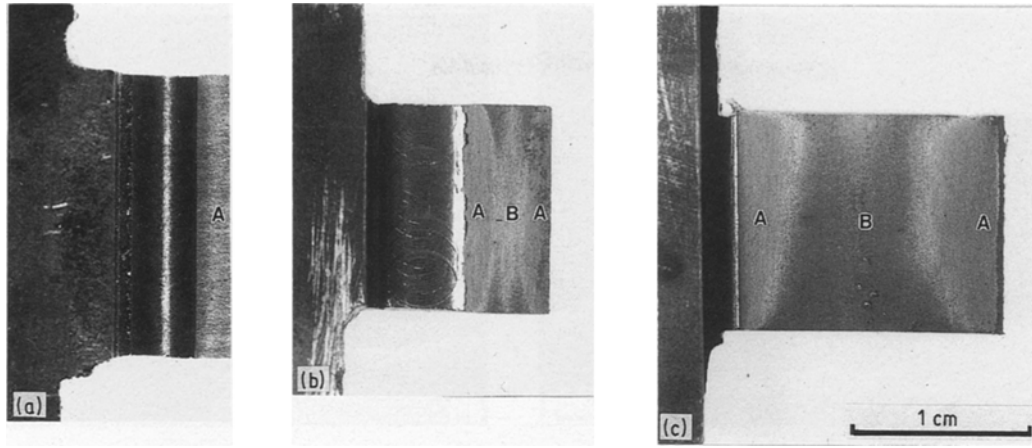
Shear fractures of diffusion-bonded joints in STA condition. Overlap length, L (mm); (a) 2, (b) 4.9, (c) 15.1. Fracture zone 1 at A and zone 2 at B.
